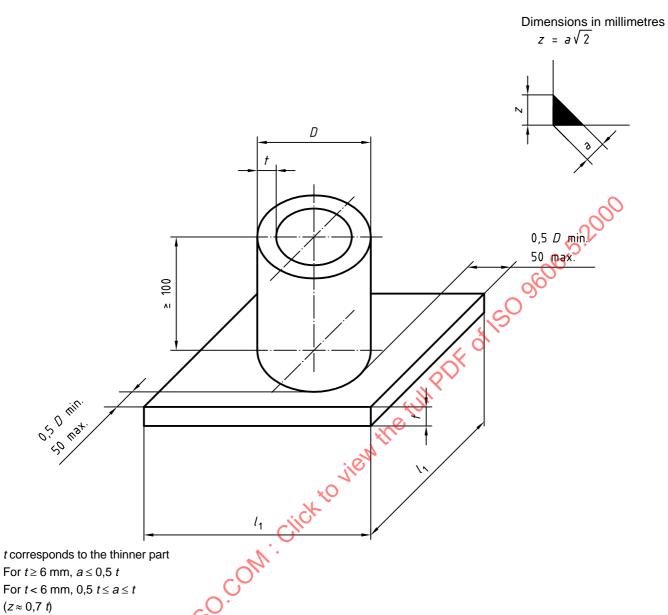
Dimensions of test piece for a fillet weld on pipe
